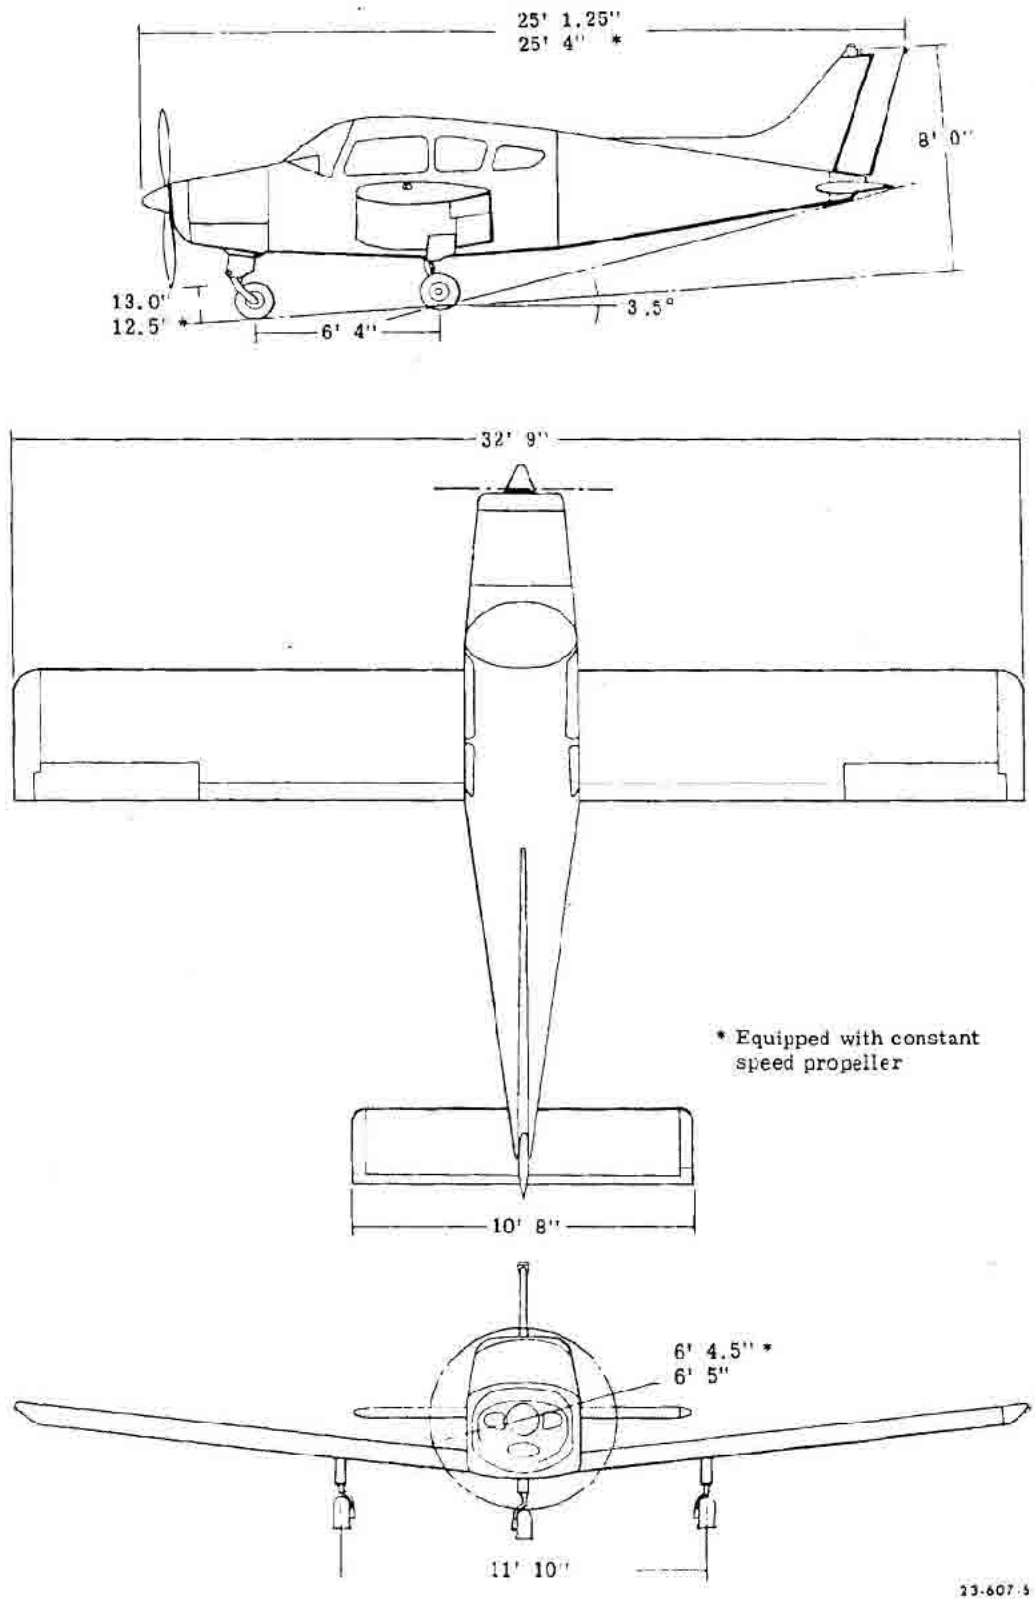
Dimensions of Aircraft (MA-1 thru MA-363)
